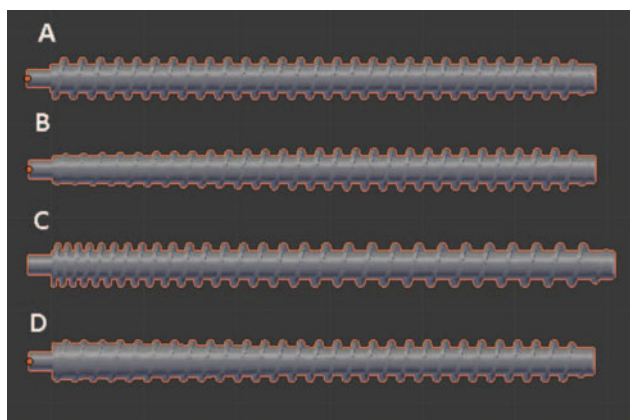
Different screw shapes for investigating slide-in behavior: (a) reference screw, (b) conical threads, (c) variable thread pitch, (d) variable screw shaft diameter.
